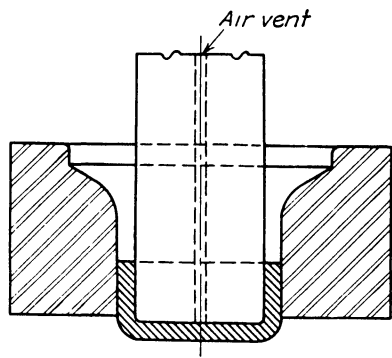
Finishing the cupped shell started in Fig. 164.
